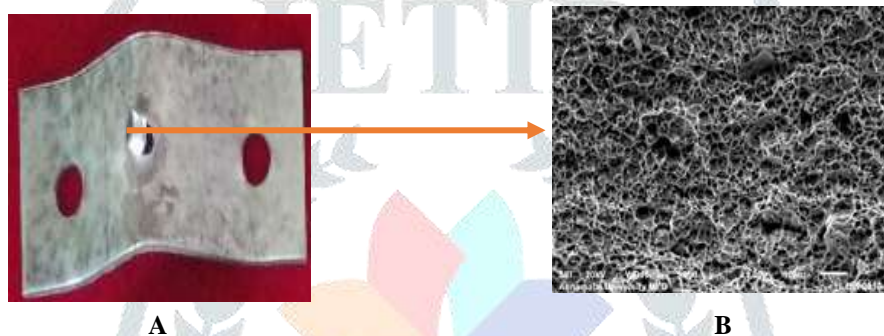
Fracture surface of the RSW DP600 steel after cross-tensile test (a); detailed appearance of the fracture surface shown in (b)
